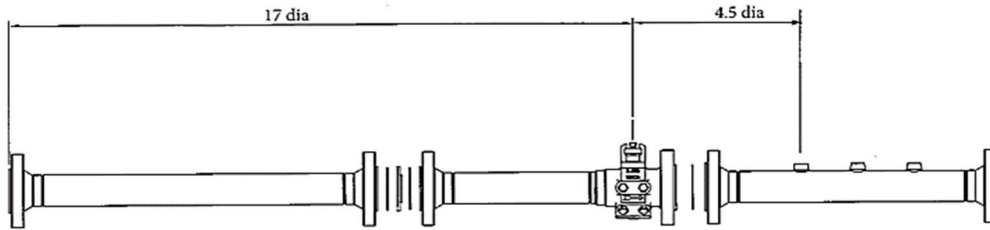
Typical Single Chamber Custody Transfer Meter Run
